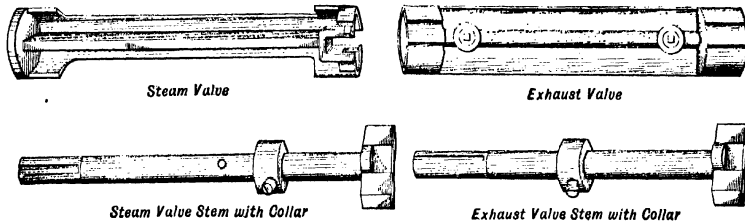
Steam and Exhaust Valves of a Corliss Engine.
